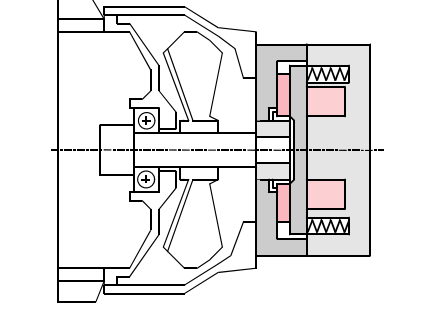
Geared motor with "built-on brake" on the fan cowl
